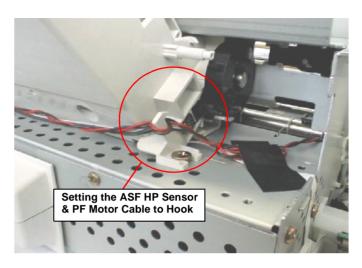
Setting the ASF HP Sensor & PF Motor cable
